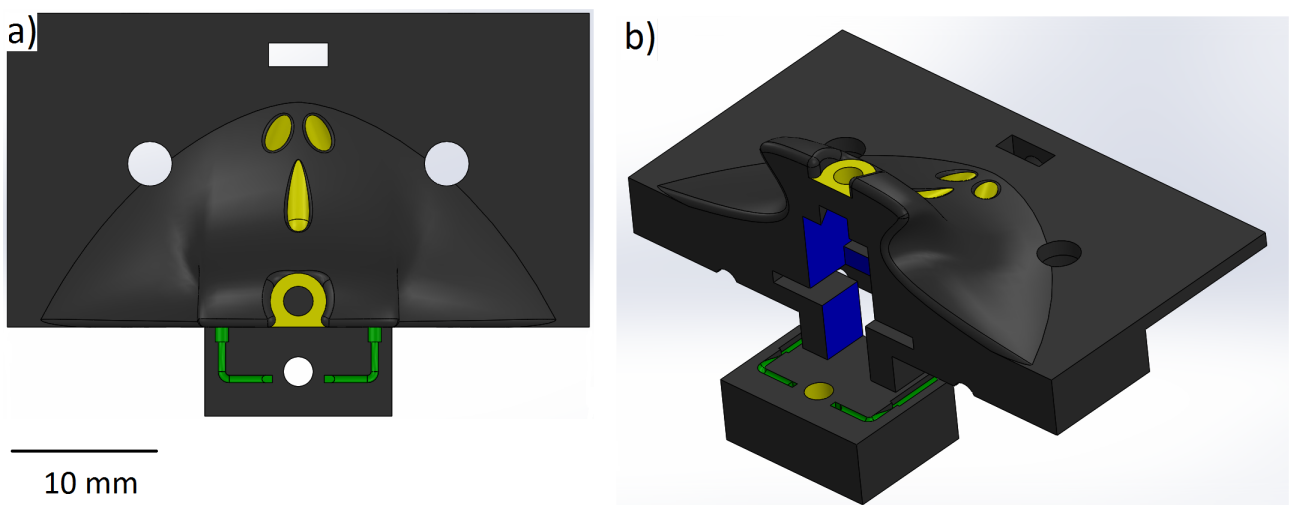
a) Top view of the Z control piece. b) Side view of the Z control piece.
